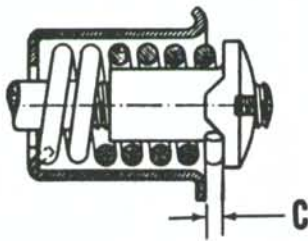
Clearance (C) should be more than 0.06 inch. If clutch slips when adjusted to minimum clearance, renew plates as necessary.
